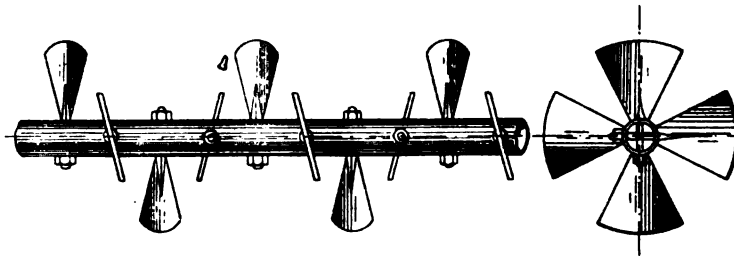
Paddle Worm, or Broken-bladed Conveyor.
